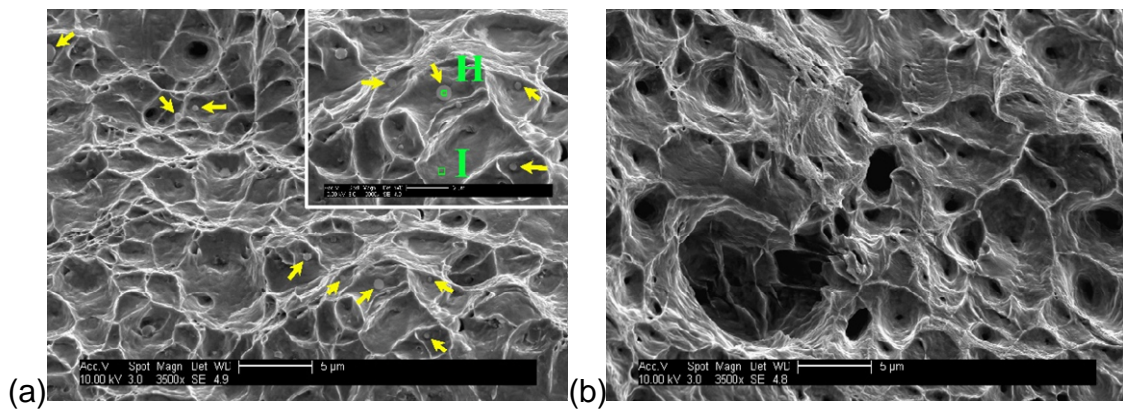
Fracture surface of tensile specimens built using (a) torch shielding only (b) torch + tent shielding.
